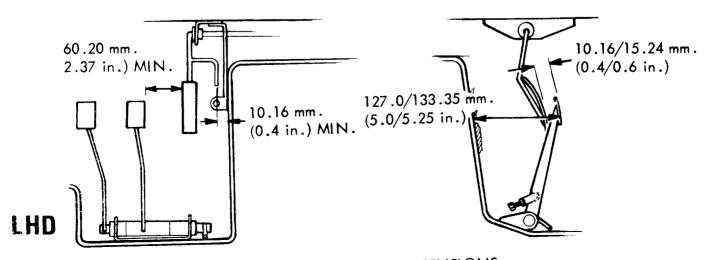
PEDALS "Set-up" DIMENSIONS.
